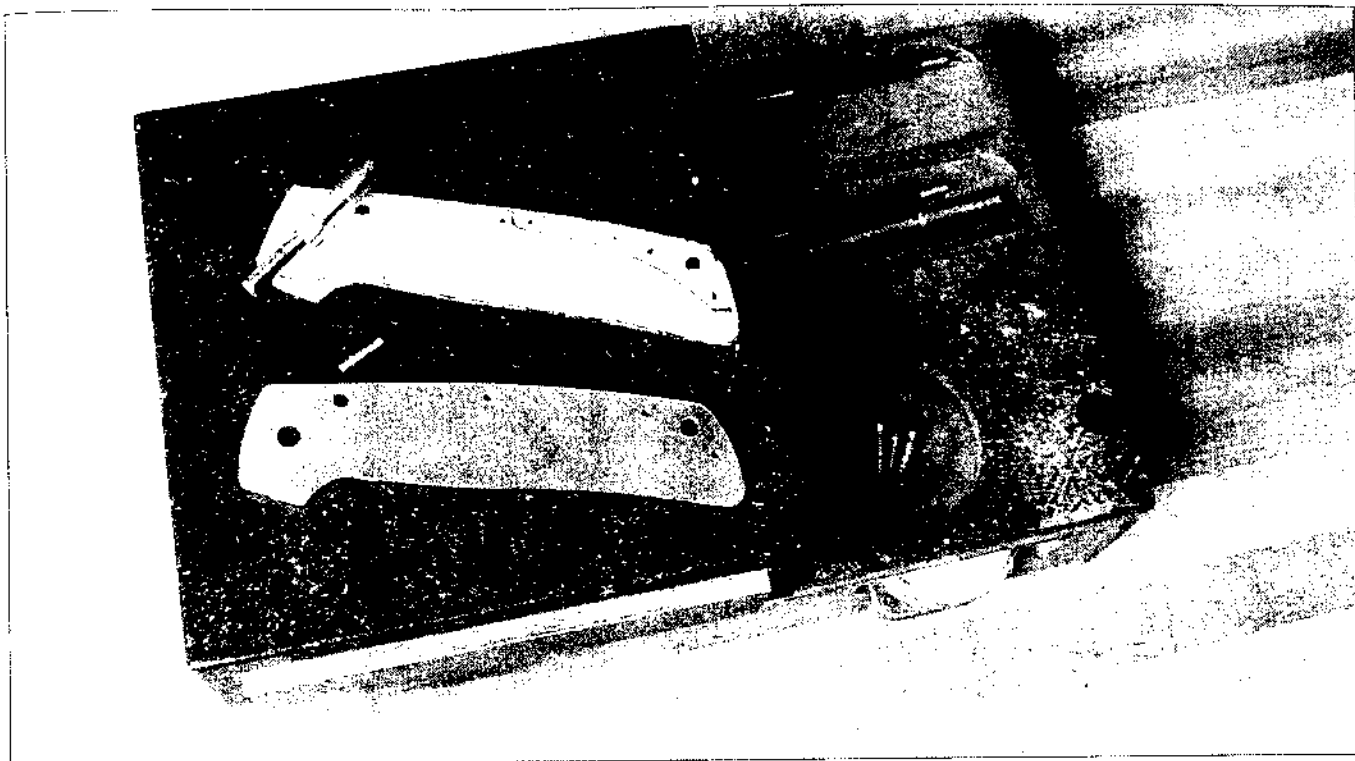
Profile grinding the handle on the flat platen grinder. All three parts are still together.
